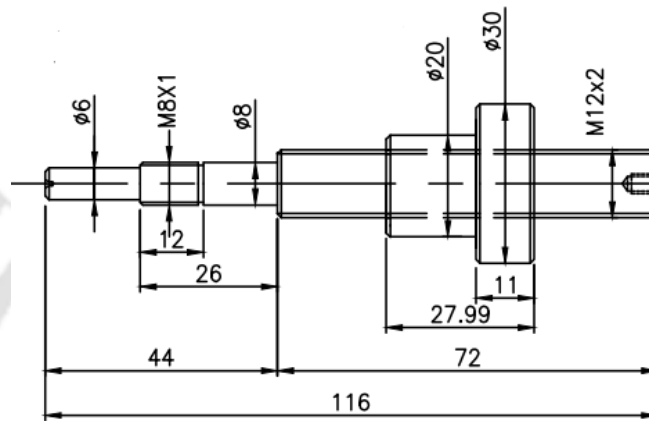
IAR 12×2 ball screw with its dimensions (Honda Engine)
